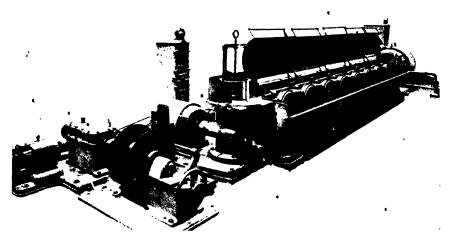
A nine-die tandem machine used for non-ferrous metals
